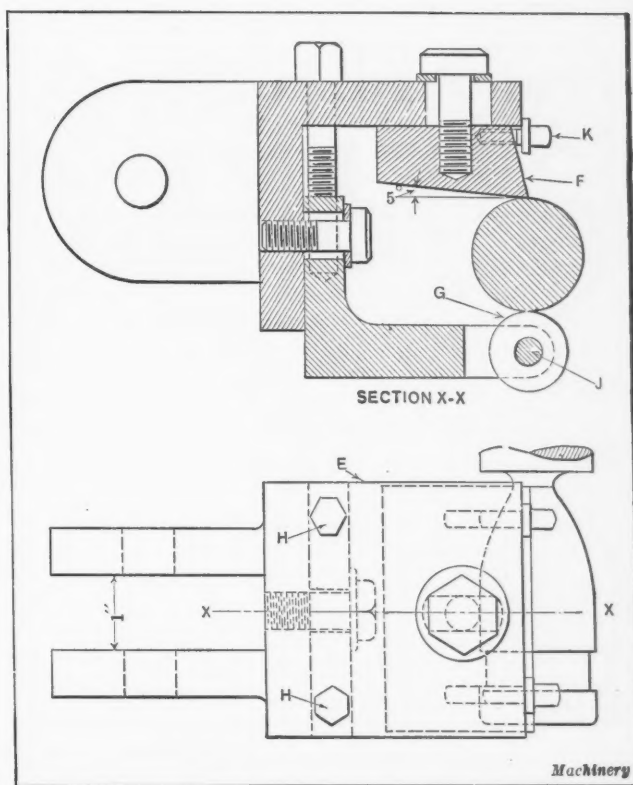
Forming Tool used in Holder shown in Fig. 1
